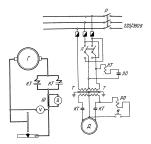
Diagram of electrical connections of IIIII - 5 Semi-Automatic A. C. Welding Machine
